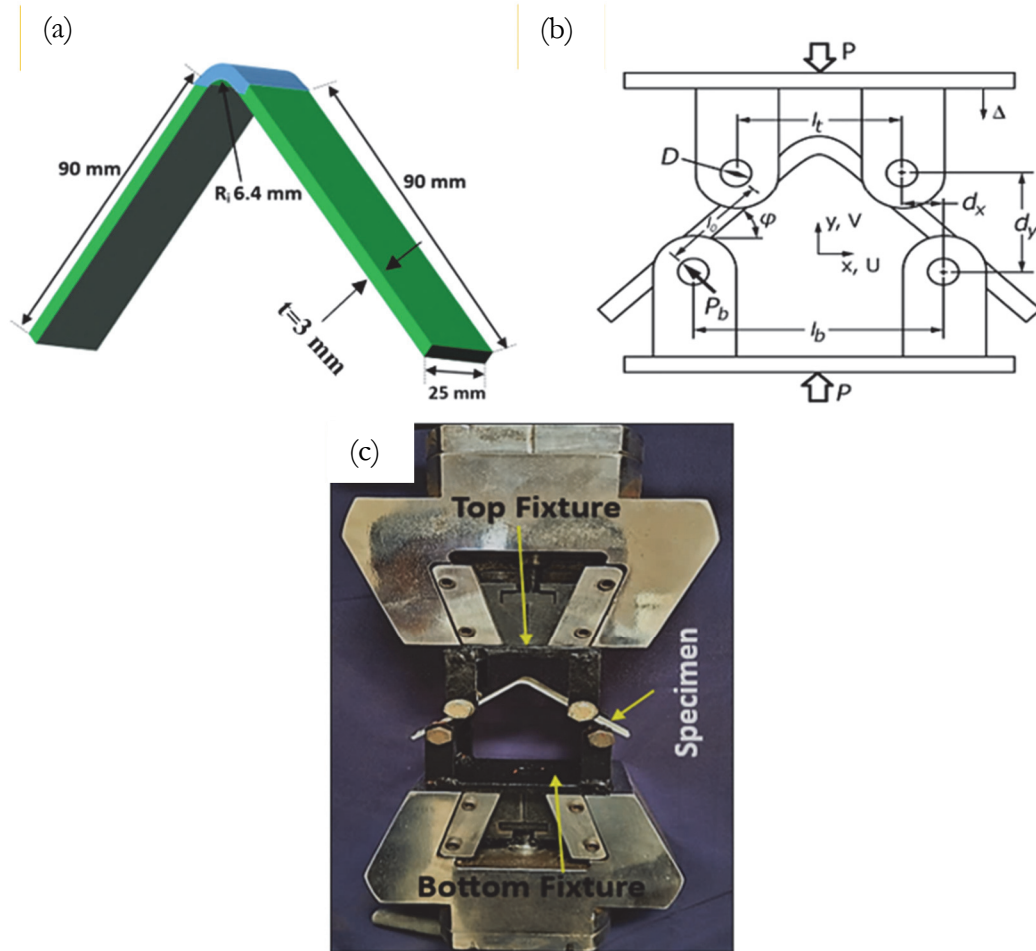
(a) L-bend laminate dimensions (b) Four-point bending fixture as per ASTM D 6415 and (c) Four-point bending fixture and loaded specimen in UTM
